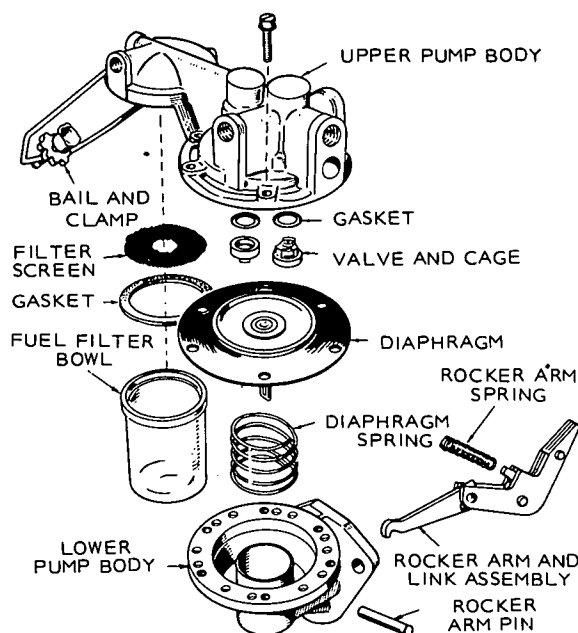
EXPLODED VIEW OF J-SERIES PUMP
